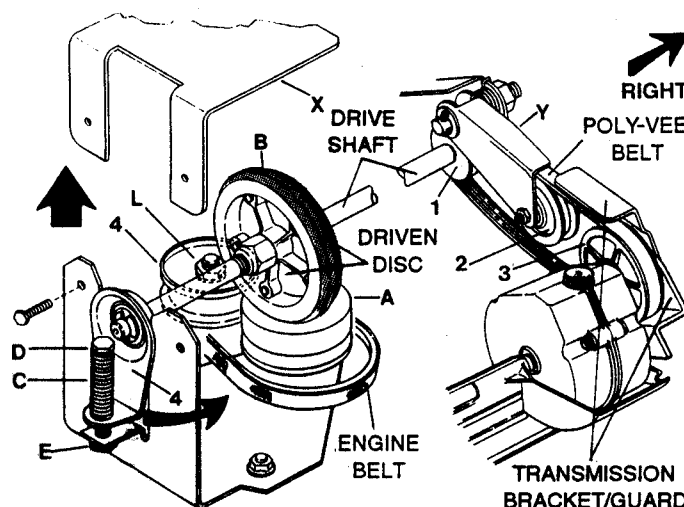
ENGINE/DRIVE BELT DETAILS
